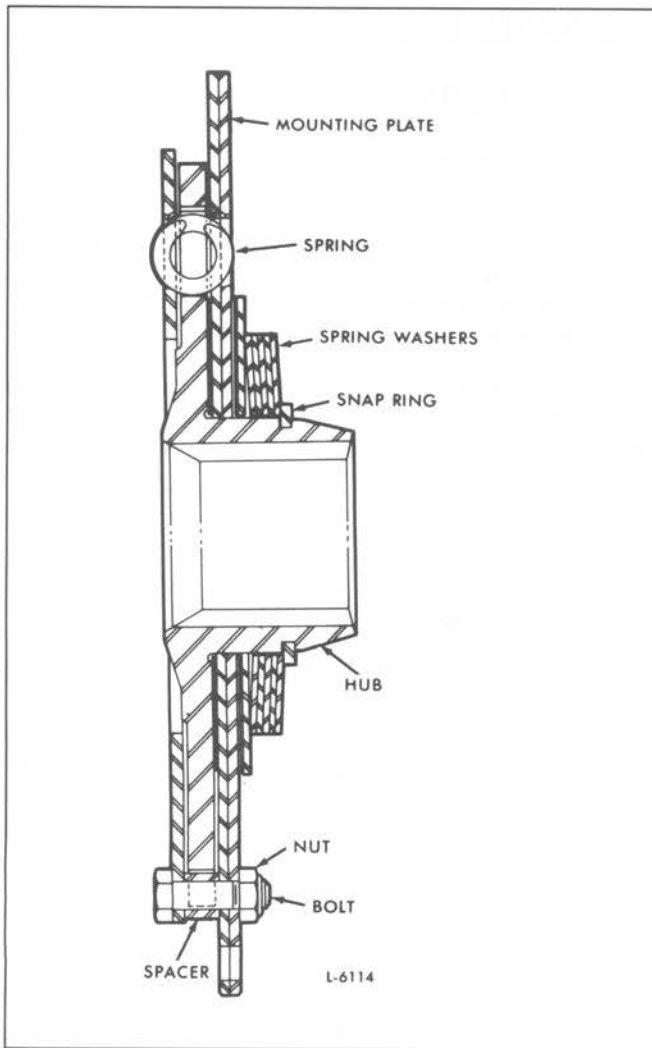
Engine Drive Shaft Flexible Coupling (Remote Mounted Transmission)
